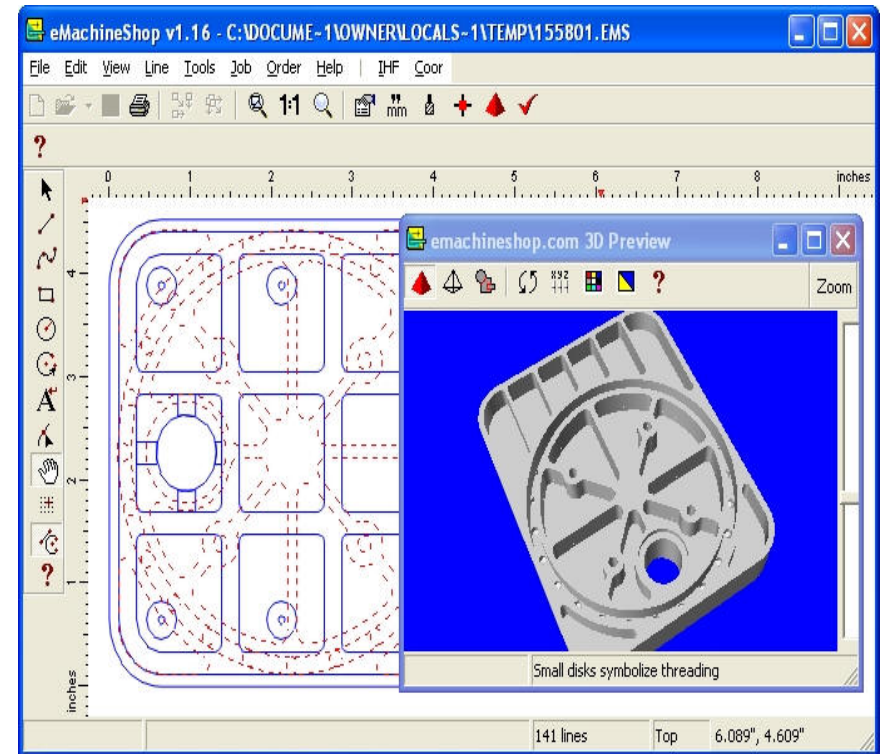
Exhibit CNC. Aluminum part flexibly produced by a CNC milling machine. A web-based design program can be used to create instructions for the milling machine. Source: emachineshop.com.
